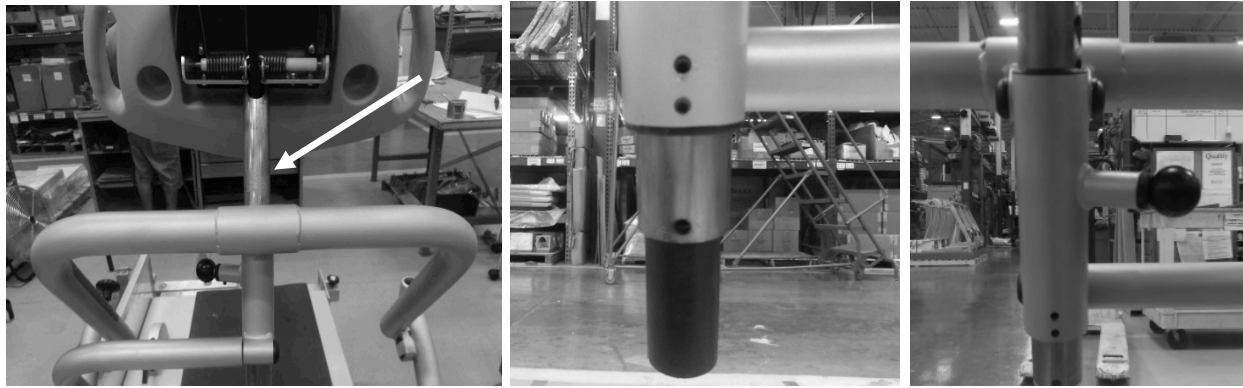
Grease the Shaft of the Male Tube Subassembly (Left), Inserting the Male Tube Subassembly (Center), and Engaging the Knob in the First Hole of the Shaft (Right).
